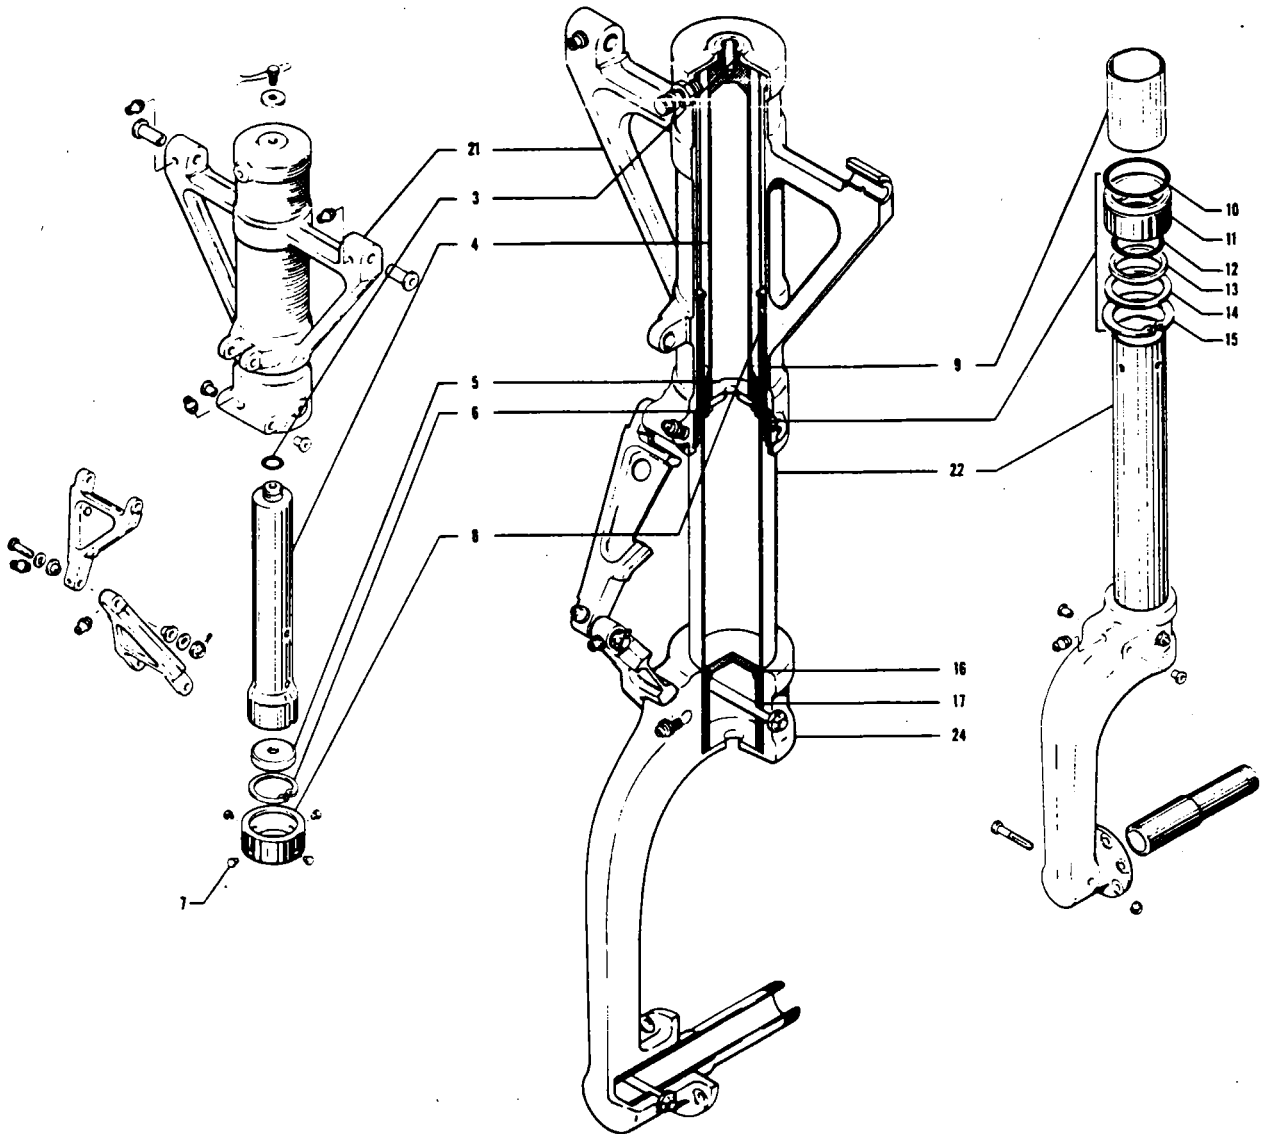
Main Gear Oleo Strut Assembly (cont.)
